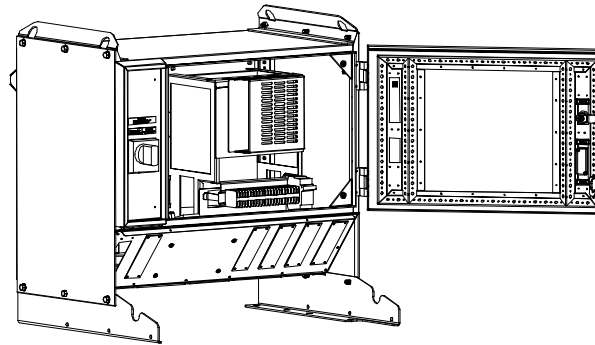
SpotWelding cabinet equipped with a weld timer from WTC/Medar.
